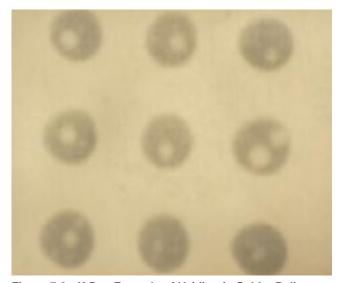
X-Ray Example of Voiding in Solder Ball Contacts
